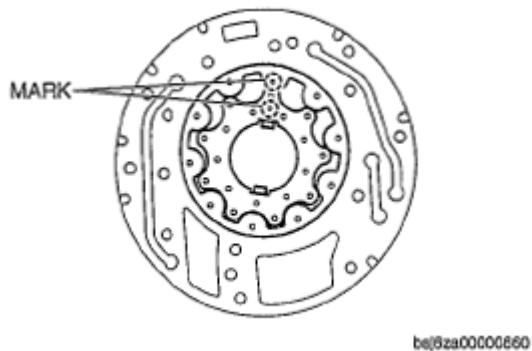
Identifying Alignment Marks On Oil Pump Gear
